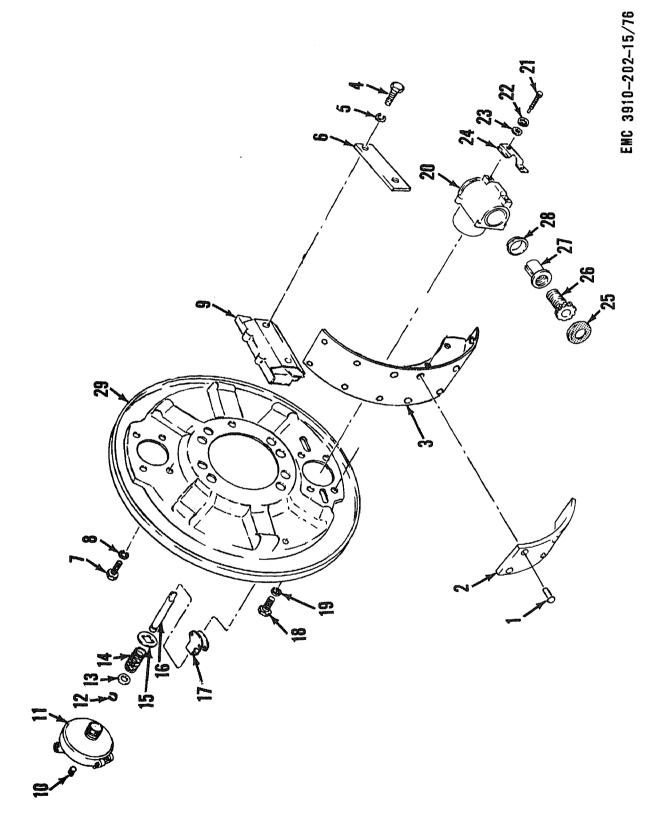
Brake chamber, housing, shoes and backing plate, exploded view.
